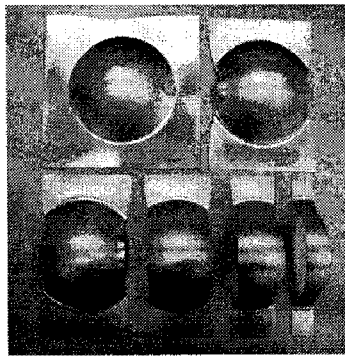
Deformed shape of the blank after the formability test at 200°C
